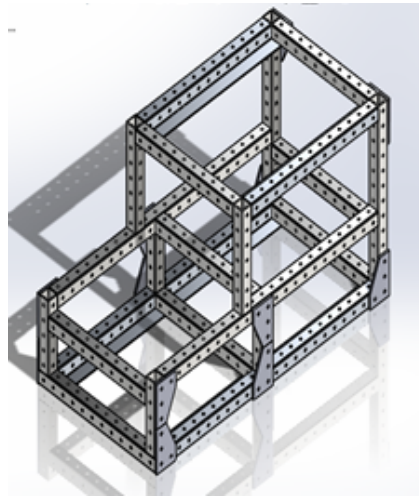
Final SolidWorks design with 8020 square and flanged tubing
